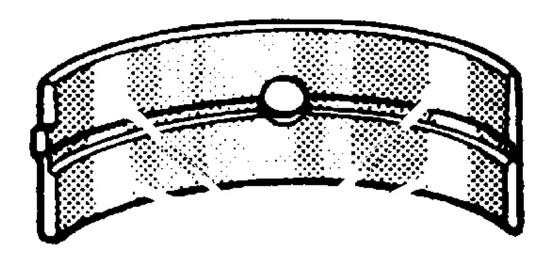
Crankshaft Bearing Polished Sections (Improper Seating) Courtesy of GENERAL MOTORS CORP.
